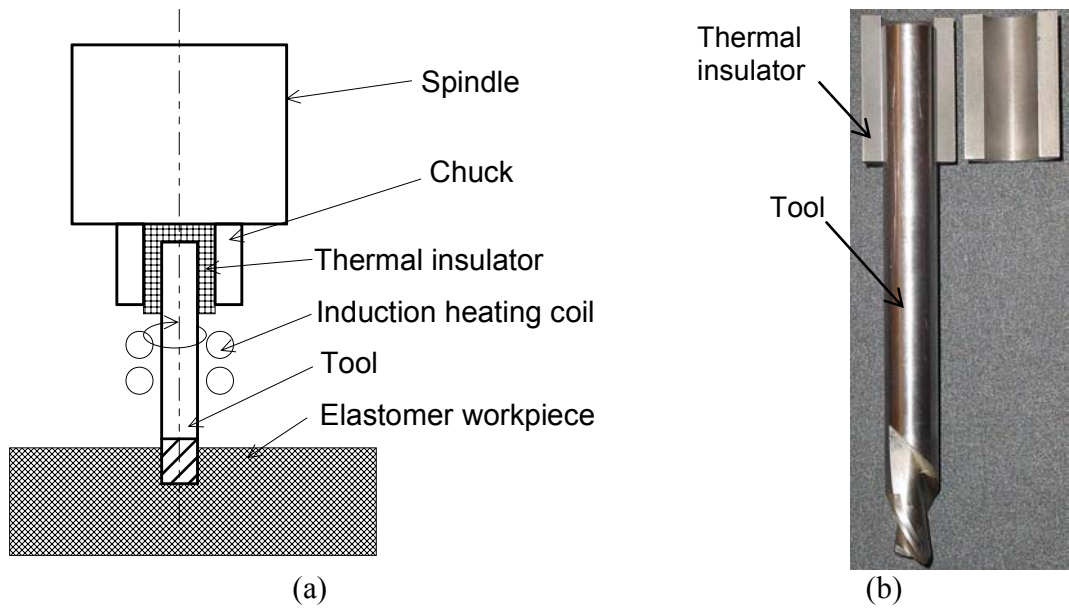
(a) Induction-heated tool machining of elastomers and (b) the double-flute down-cut end mill and titanium thermal insulator.
